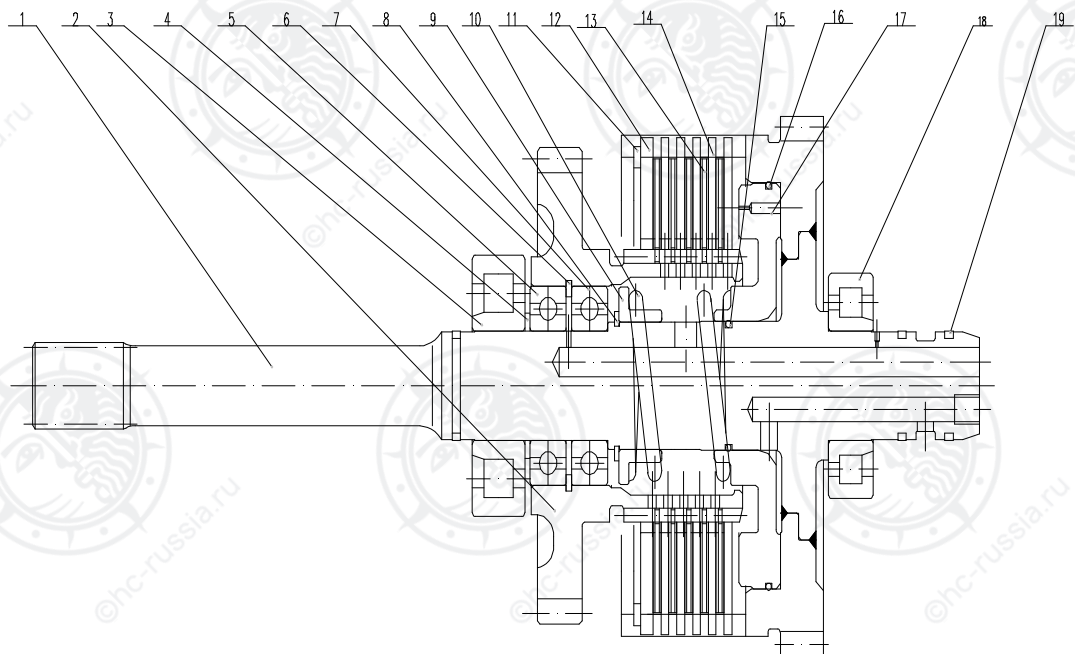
YQXF35-1000 input shaft/YQXF35-5000 intermediate shaft clutch assembly
